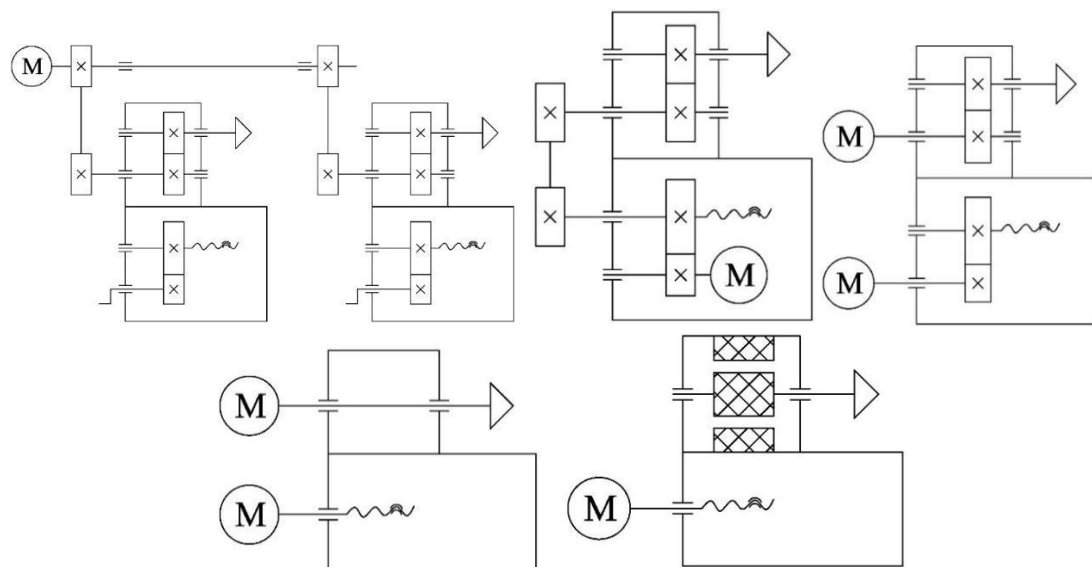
The evolution of the electric drive of the main movement on the example of lathes: a- group for several machines; b – general for one machine with stepped gears; c- individual with a stepped box; d) - c- individual with stepless regulation; e) - motor-spindle of ratio
